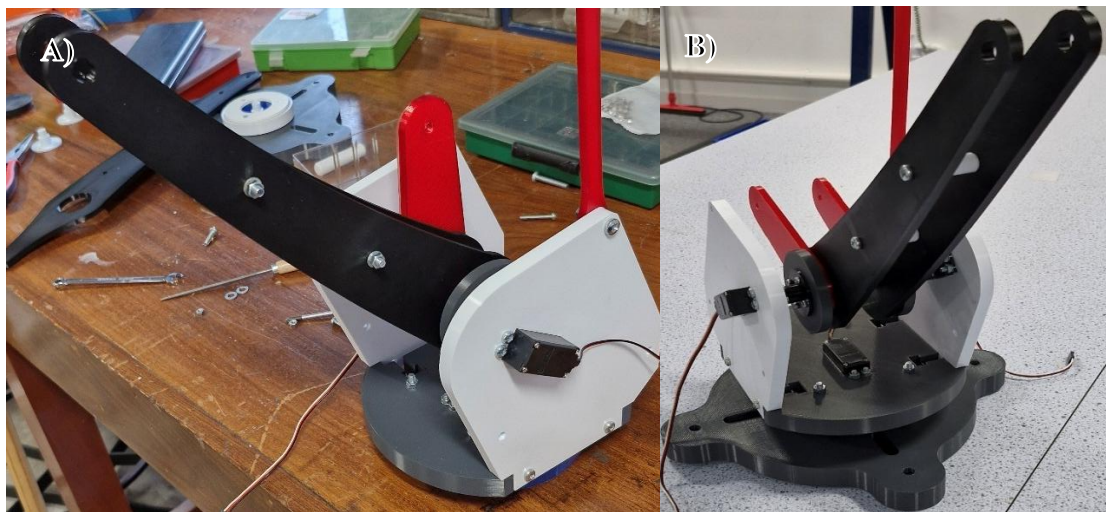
A) Lower arm assembly, B) Lower arm assembly attached to base
